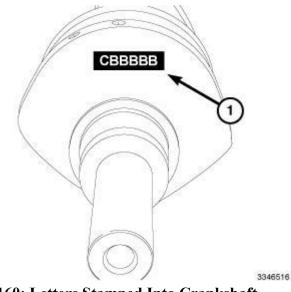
Letters Stamped Into Crankshaft Courtesy of CHRYSLER GROUP, LLC
